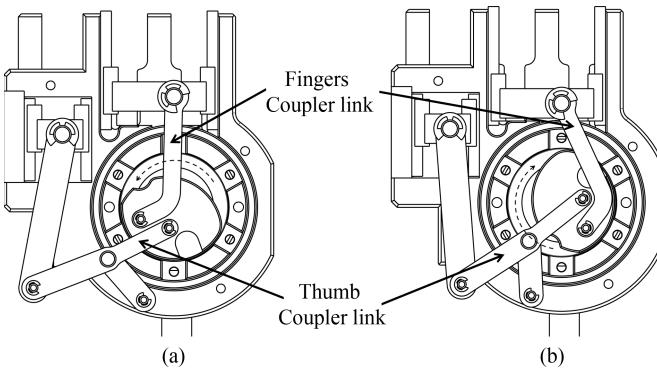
Hand mechanism. Fingers and thumb coupler link could move to the limited position of each pattern without collision. (a) precision grip position, (b) power grip position.
